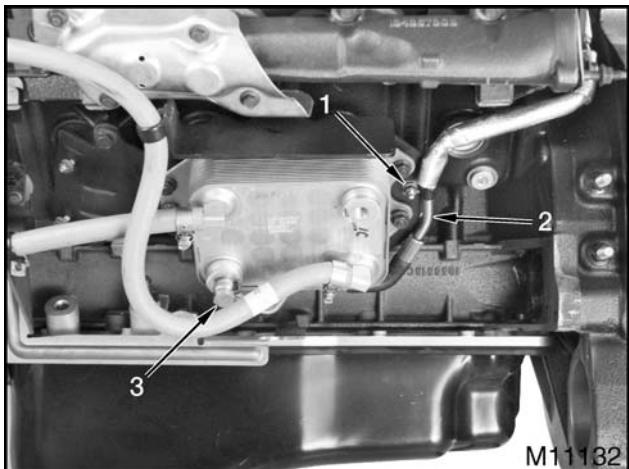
High-pressure pump to cooler tube assembly — lower connection
